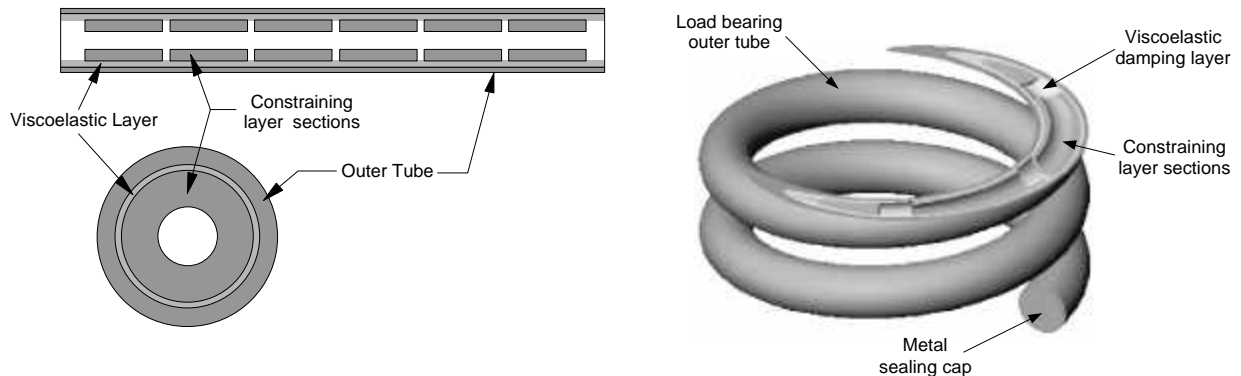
Multi-layer tubular CLD coil spring concept[†]. The right hand view shows the bottom of a coil spring, cut by a plane orthogonal to the coil axis.
